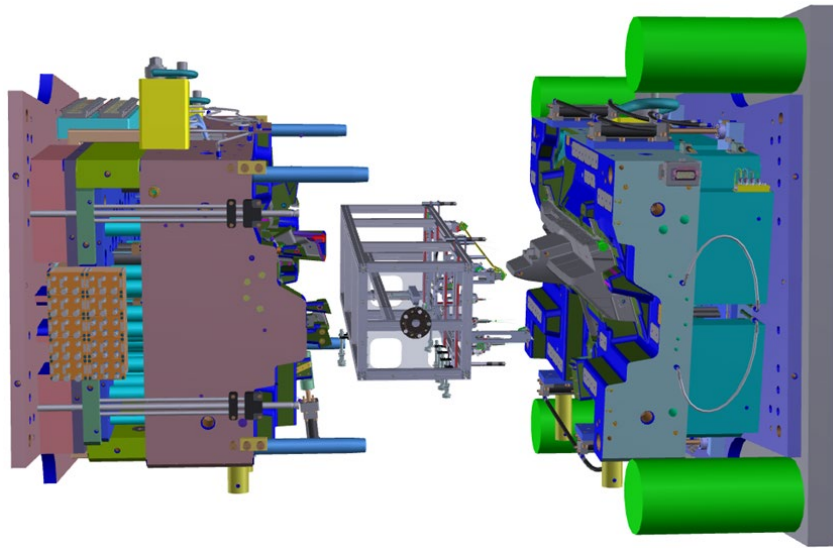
End-of-arm tooling for insertion of items to be over-molded plus removal of molded parts.
